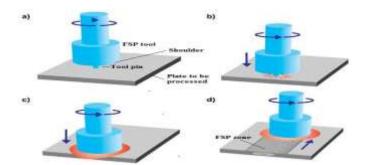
Steps of FSP (a) Rotating tool prior to contact with the plate (b) Tool pin makes contact with the plate, creating heat (c) Shoulder makes contact, restricting further penetration while expanding the hot zone and (d)Plate moves relative to the rotating tool, creating FSP zone
